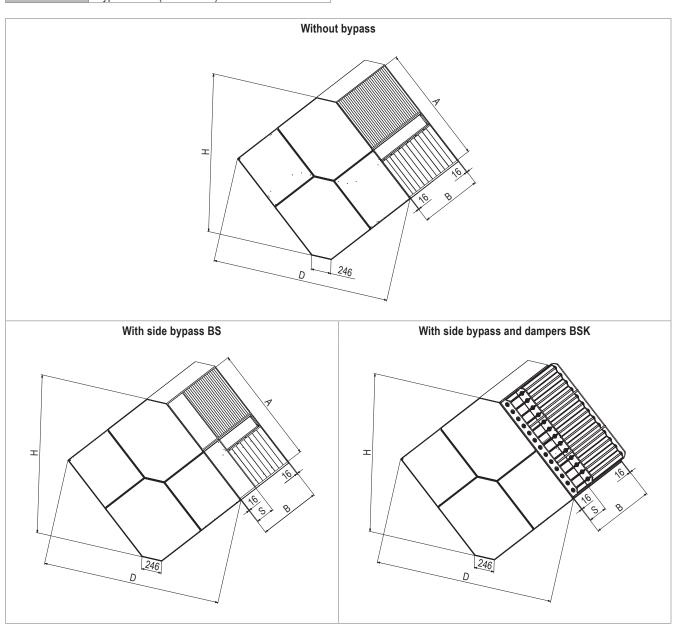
Dimension sheet for Gotthard plate heat exchangers of the standard construction type (dimensions in mm)
